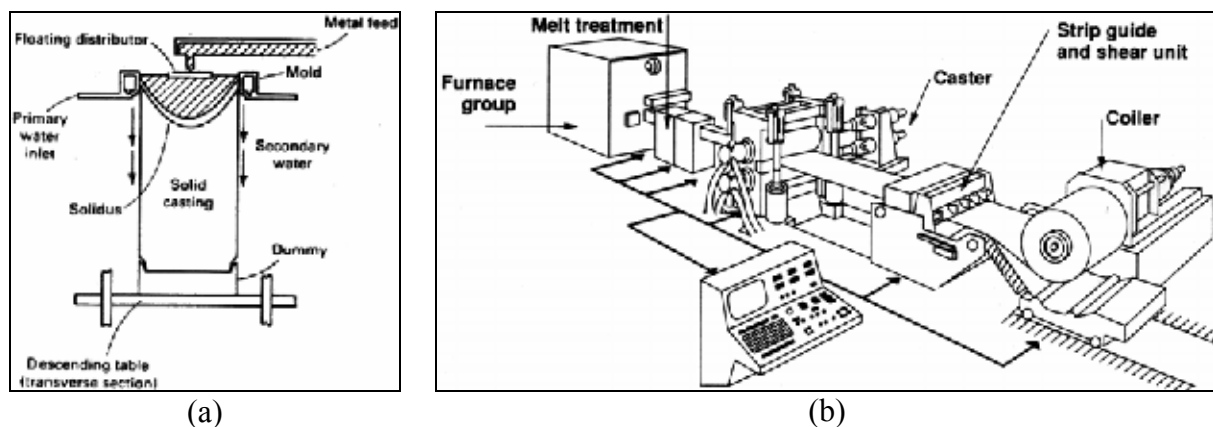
Schematic diagrams for (a) direct-chill casting [3], and (b) twin roll casting [35]
